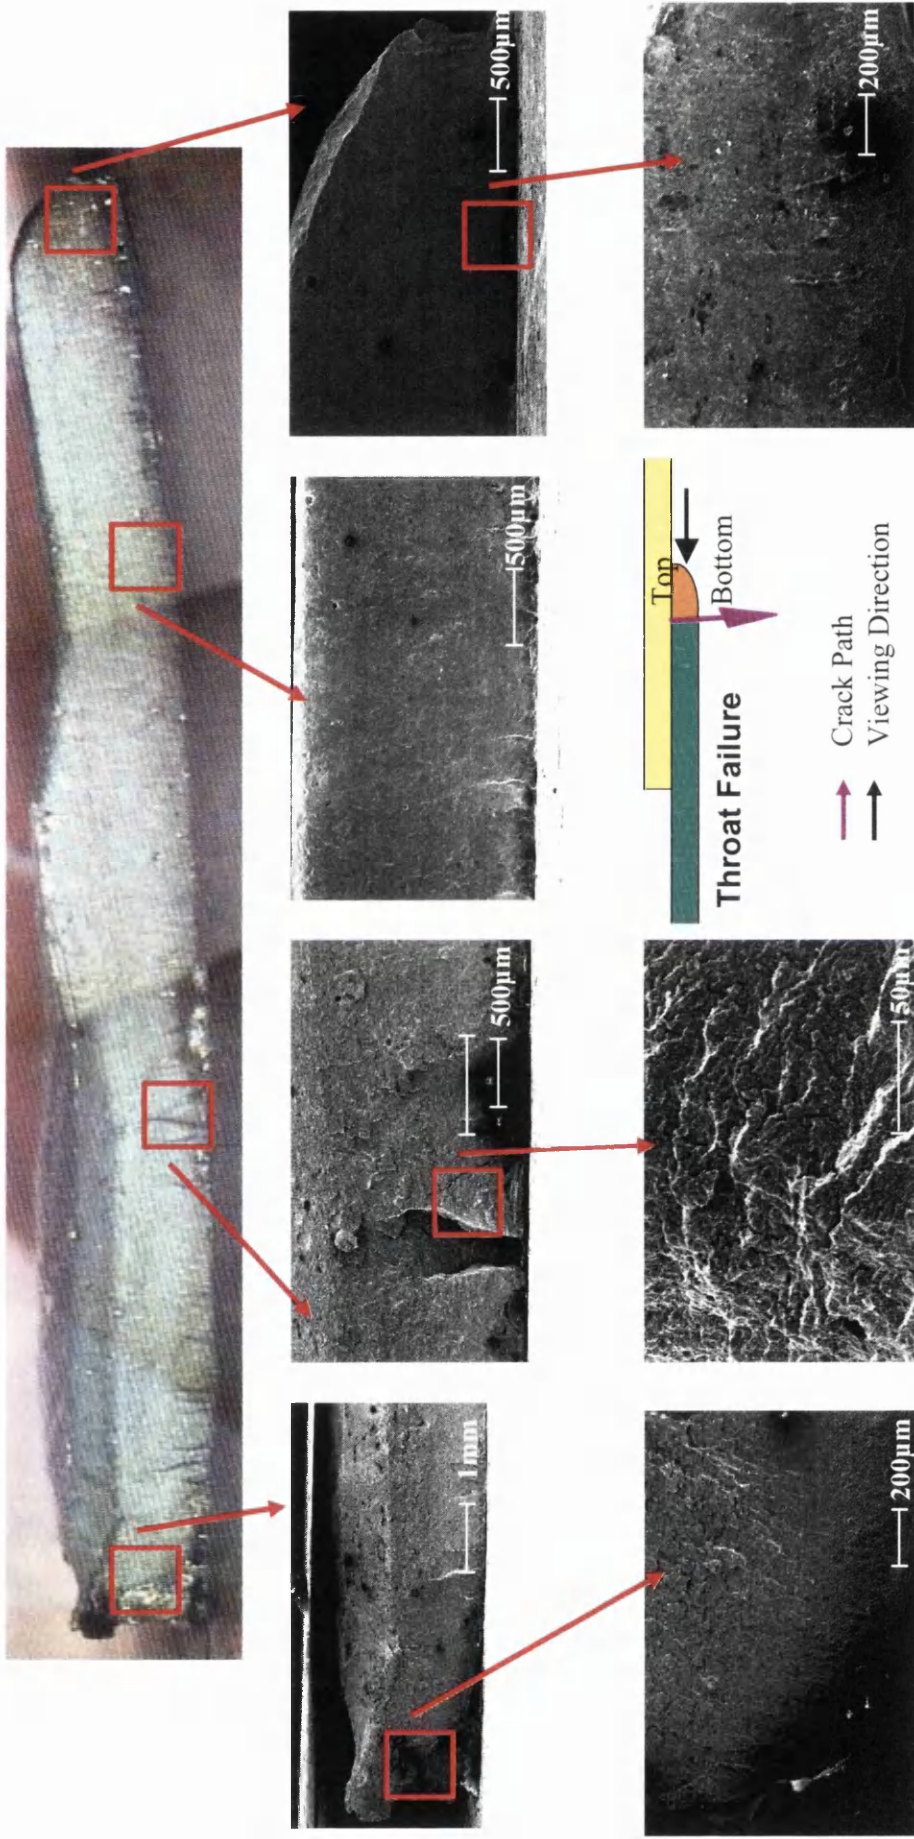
Typical Fracture Surface for Variable Amplitude SAE Bracket Load-Time History GM1 Weld Throat Failure – Weld View
